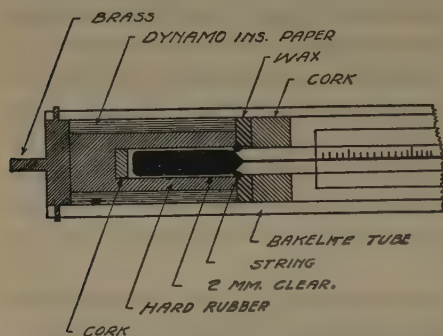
THERMOMETER IN ITS MOUNTING.
